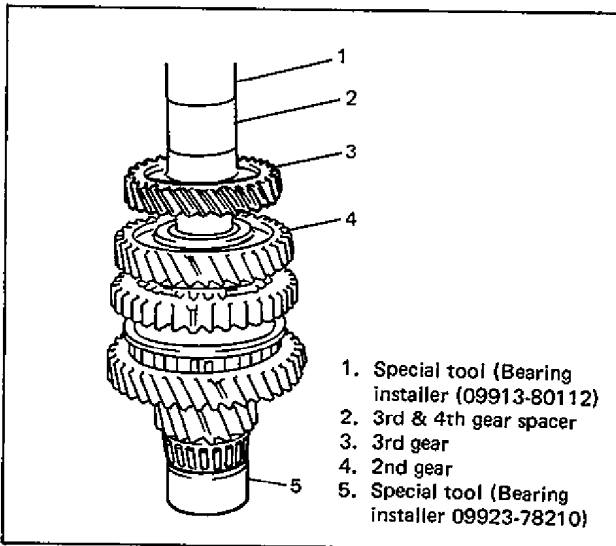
A-68 Press-fitting 3rd Gear and Spacer
